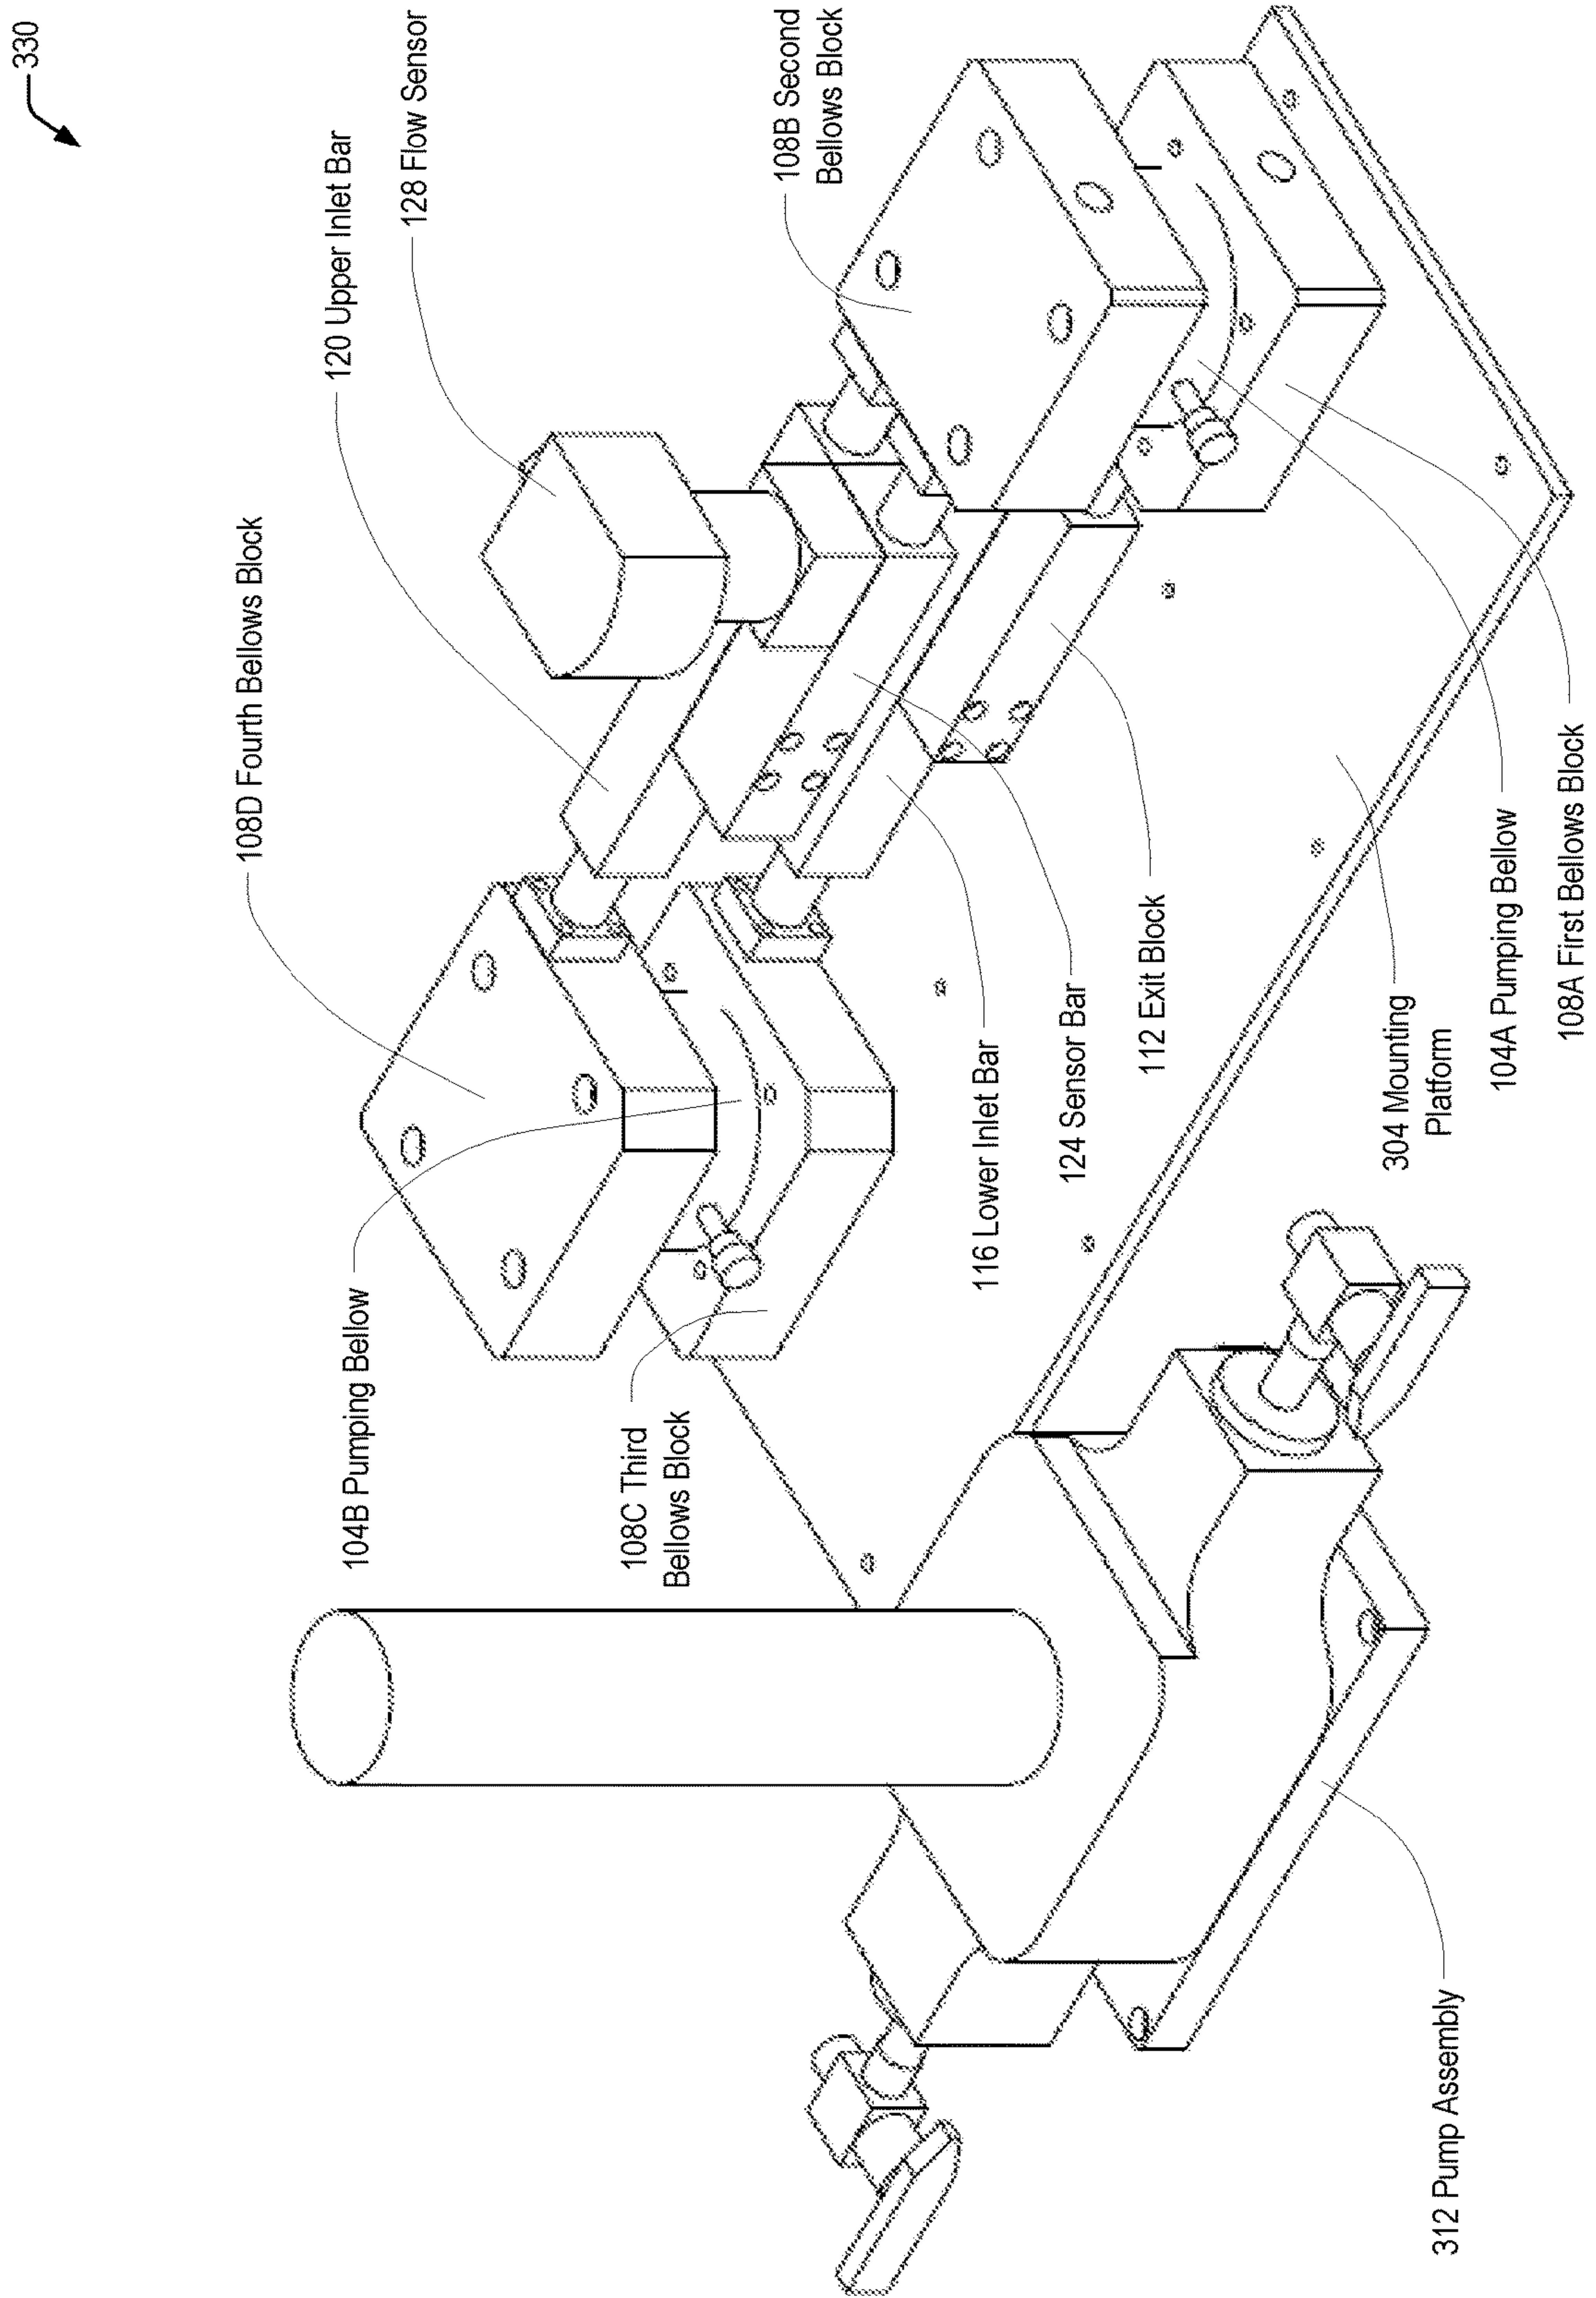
C Fluid Transfer System With Separated Upper and Lower Distribution Assemblies of First Embodiment
